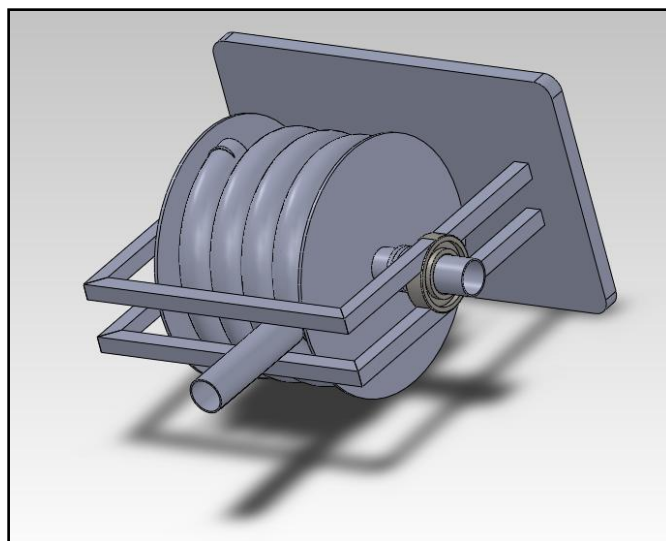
CAD drawing using SolidWorks 2011 Software.
